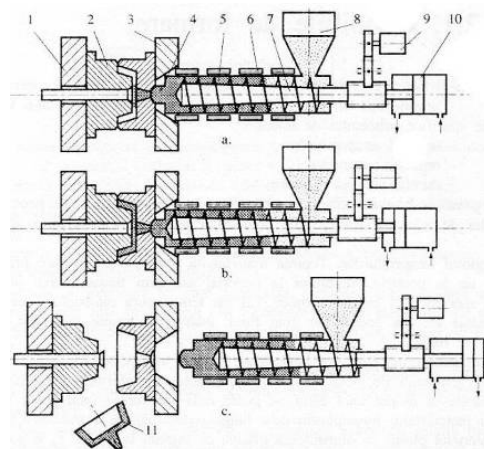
Schematic diagram of injection: a - injection molding material; B - solidification and cooling of the melt, c - throwing open the mold and the part from the mold: 1 - mobile shelf, 2 - matrix, 3 - fixed shelf, 4 - nozzle, 5 - cylinder, 6 - body heating, 7 - snail, 8 - feed hopper, 9 - drive system rotating, 10 - operating system in translational motion, 11 - piece injected
